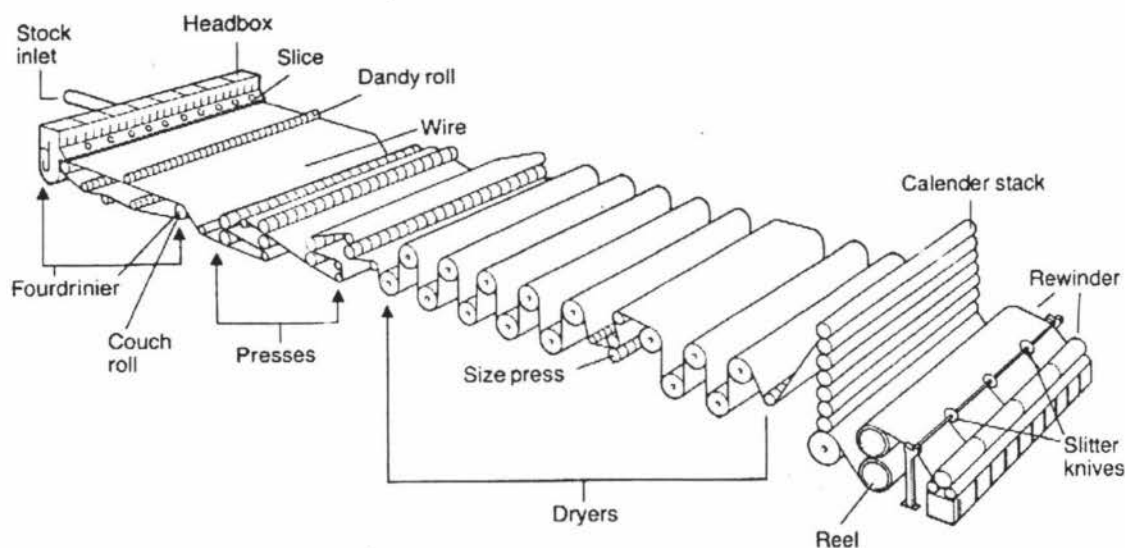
Layout of a fourdrinier type paper machine (Jönson, 1993)
